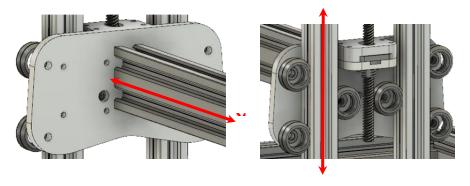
A closeup of the Z carriage assembly. This relies on two vertical shafts to maintain increased stability. The X axis shaft mounts to the plate, as do six V-slot wheels, and the leadscrew nut, encased in the assembly through which the threaded rod passes. The nut mounts on the darker plate, which is held on by the portion below it.
